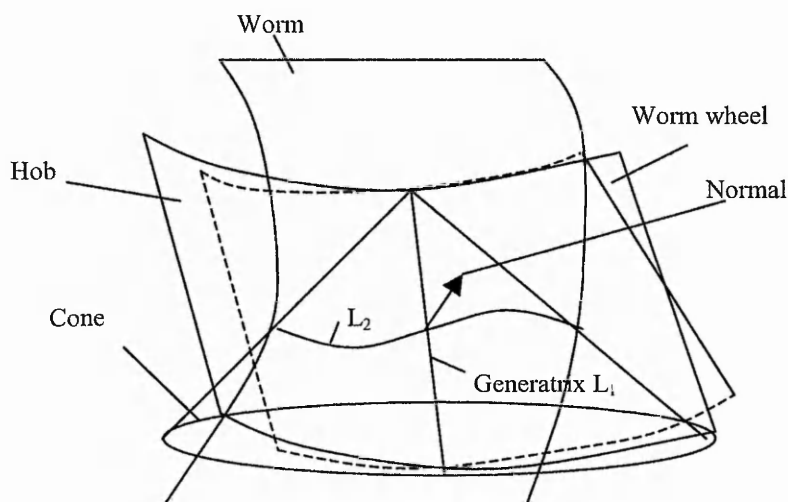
Principle of local tooth contact for double enveloping worm gears
